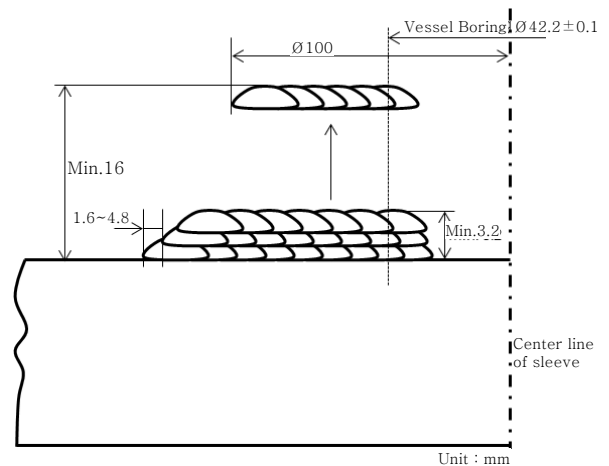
Weld shape condition of pad overlay welding requiring in ASME code
